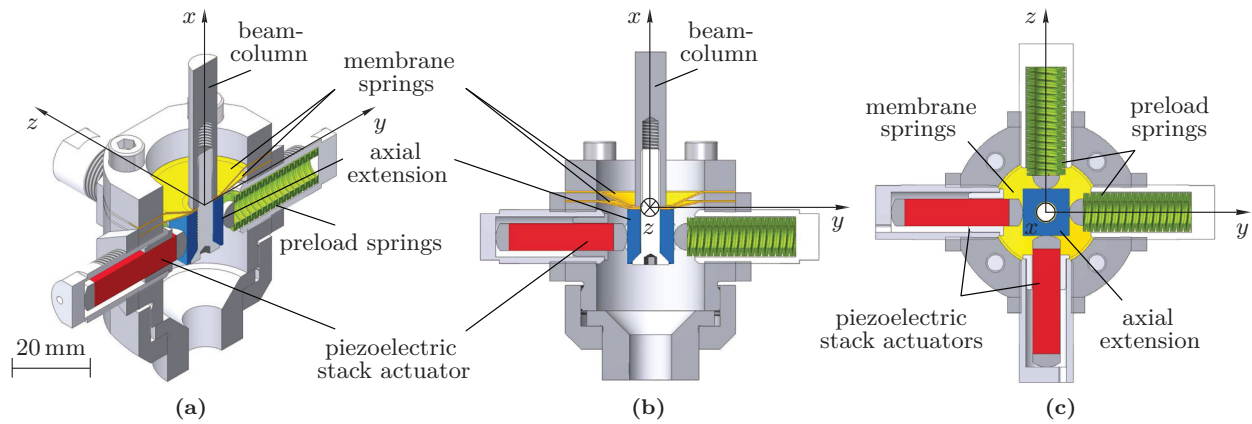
Sectional views of piezo-elastic support A, (a) 3D section through x - y -plane, (b) 2D section through x - y -plane, (c) 2D section bottom view through actuator-plane
